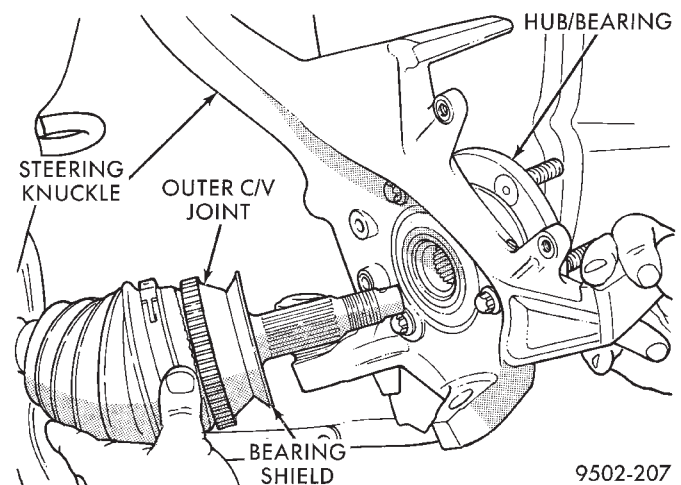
Steering Knuckle Installation on Outer C/V Joint
